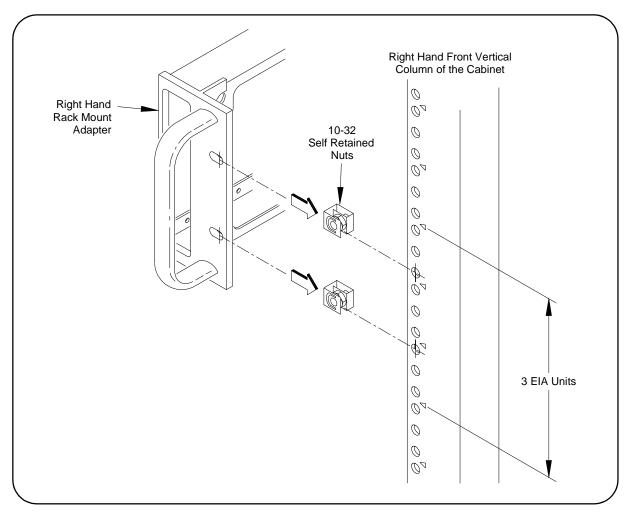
Installing Rack Mount Adapter Channel Nuts
